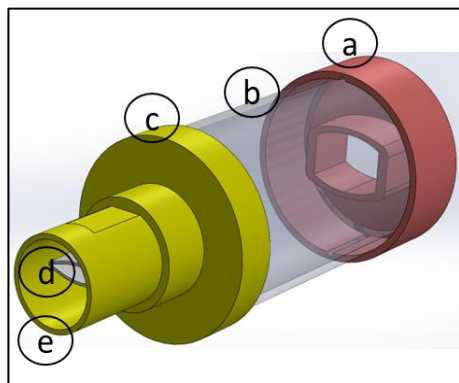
AerospaAcer parts (a) Feeder cap (b) Chamber (c) Mouthpiece (d) Control valve (e) Valve casing
